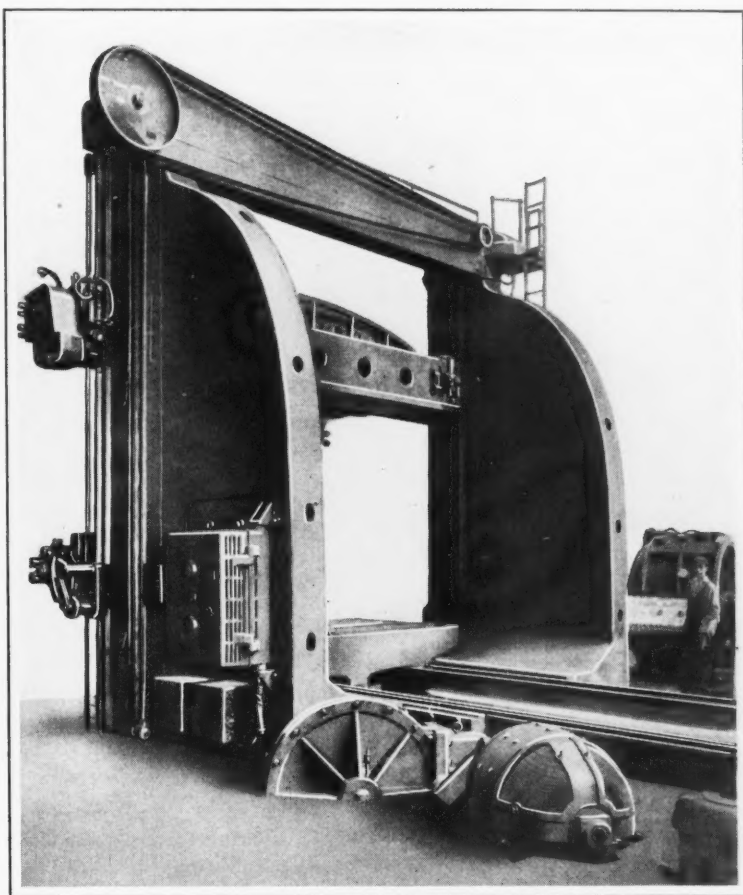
Planer Driven by a 75-horsepower Reversing Direct-current Motor with Reversing Controller Mounted on Housing of Planer
